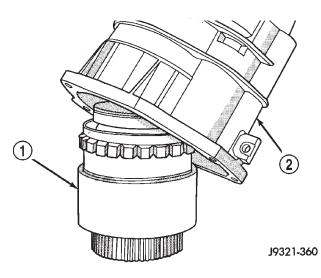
Overdrive Gear Case Installation 1 – GEARTRAIN ASSEMBLY
